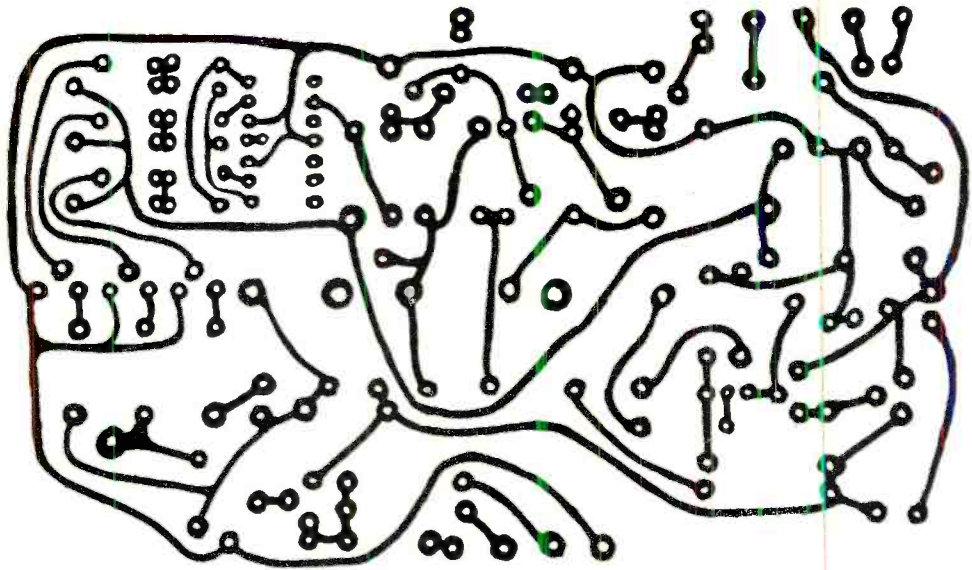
Actual size foil pattern for circuit board is shown above with component layout at left. Circuit can be assembled on a standard perf board if preferred.
